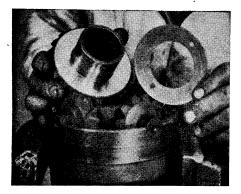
Pick up long hub side gear (right hand) and slip off thrust washer
